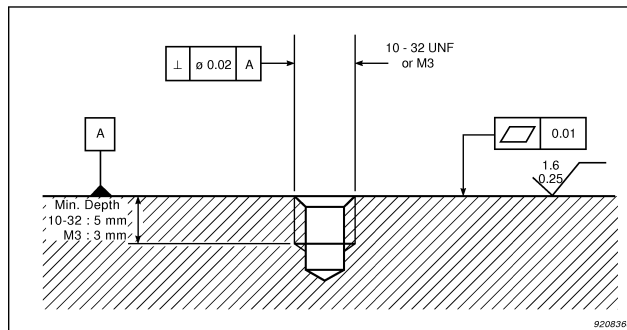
Recommended tolerances for the mounting surfaces. Dimensions and symbols in accordance with ISO 1101
